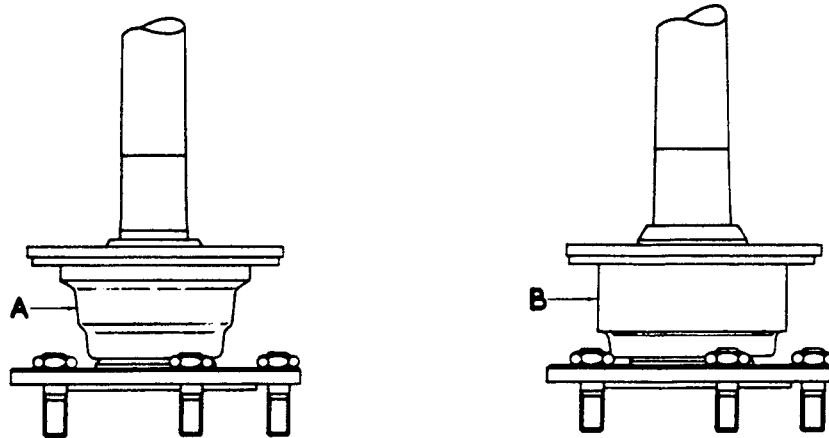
VIEW SHOWING DIFFERENCE IN EXTERNAL SHAPE OF BEARING HOUSINGS 'A' SMALL BEARING 'B' LARGE BEARING.
